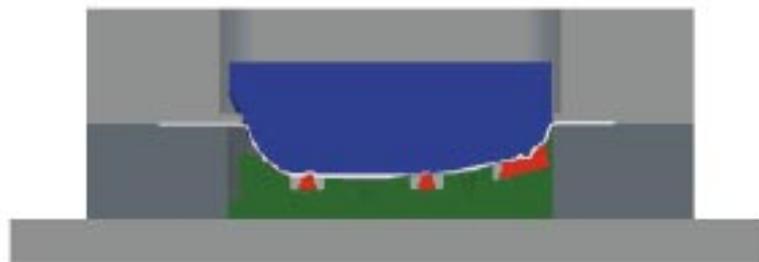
Cross section of PU calibration tool - Final calibration step
